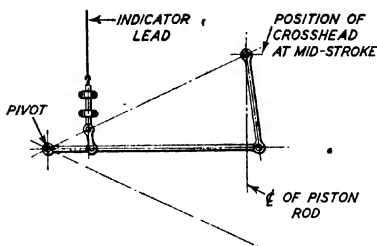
CORRECT REDUCING GEAR OF LEVER TYPE
